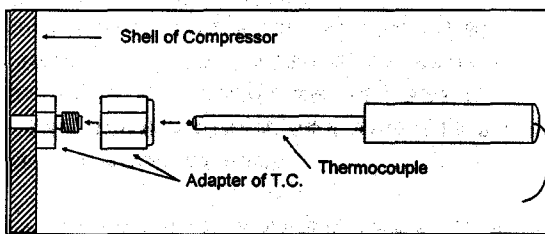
Schematic of thermocouple attachment at the compressor shell
